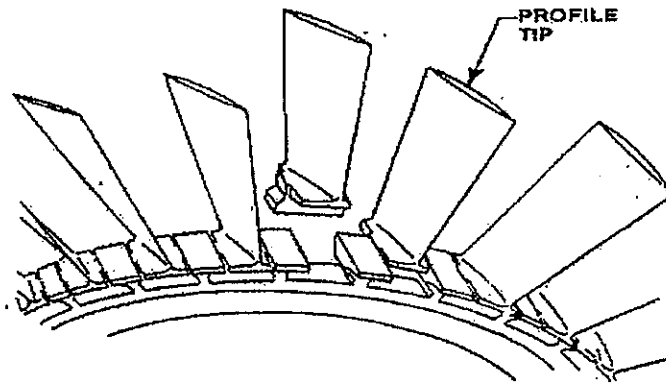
A-23 Dovetail method of securing compressor blades to the disk.
